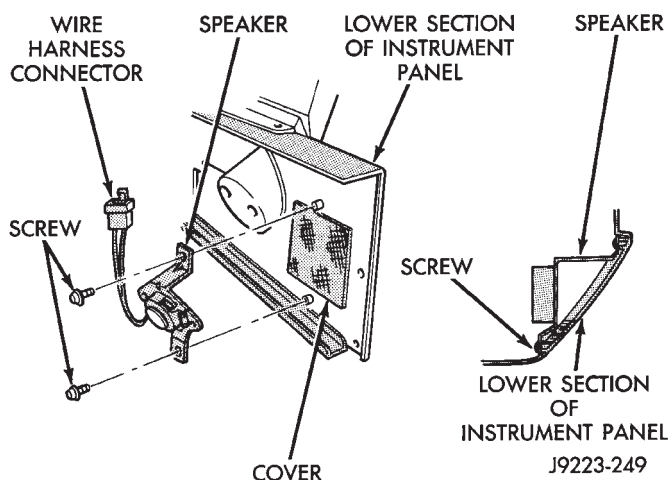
Instrument Panel Speaker Remove/Install - XJ
